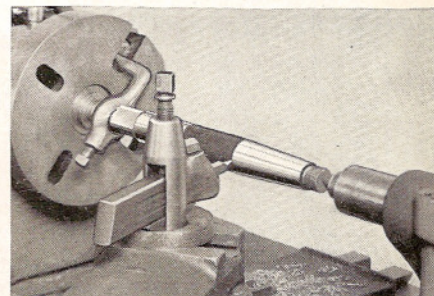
Turning a Taper on a Shaft in the 9-inch Toolmaker Lathe.
